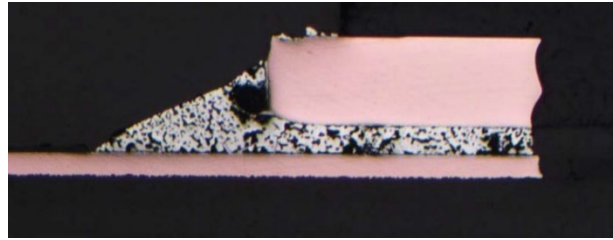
MLF-20 SnPb Solder, Did Not Fail
